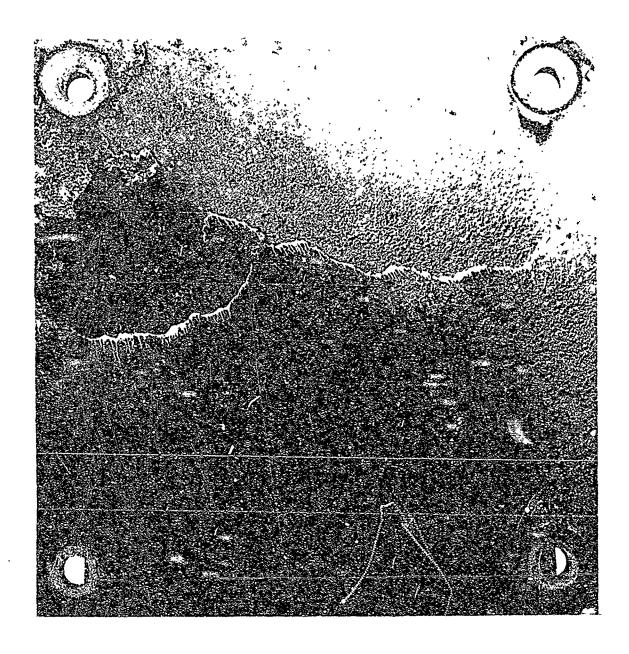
Coating Specimen RSA 64-30-A After Test No. 1
